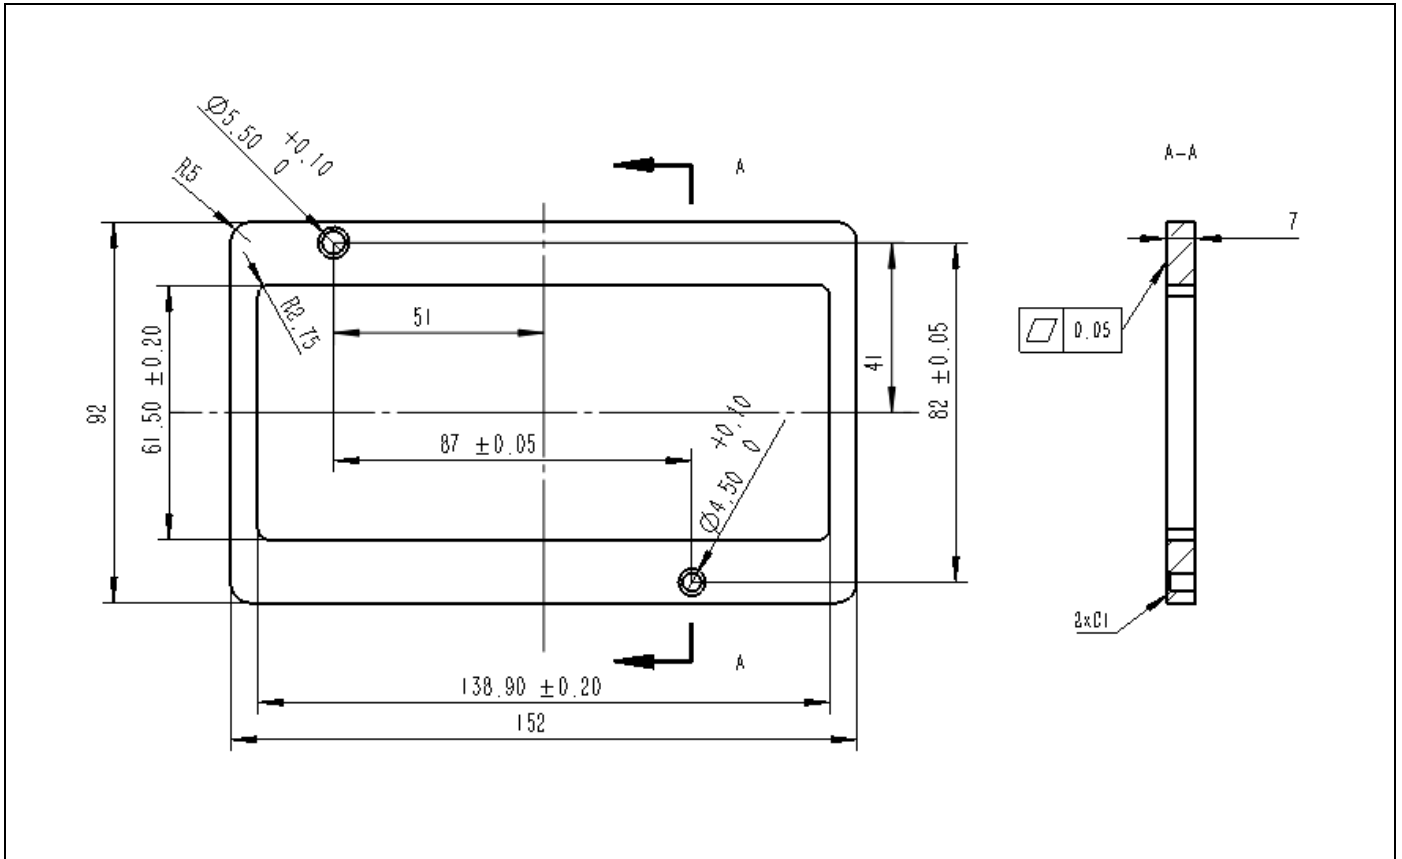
Technical drawing of the bottom press-in tool; Material: ABS plastic.
